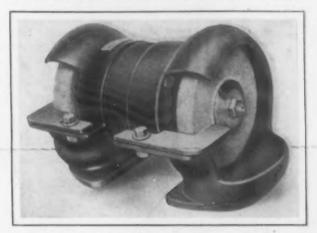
A New Type of Tool Grinding Machine Designed for Medium and Heavy Work
